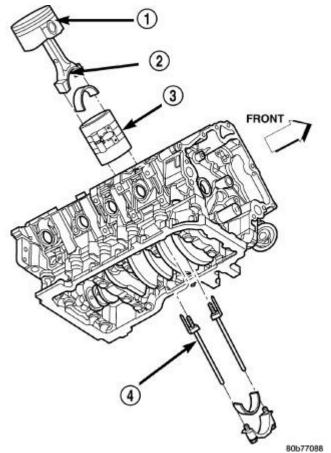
PISTON AND CONNECTING ROD INSTALLATION Courtesy of CHRYSLER LLC
